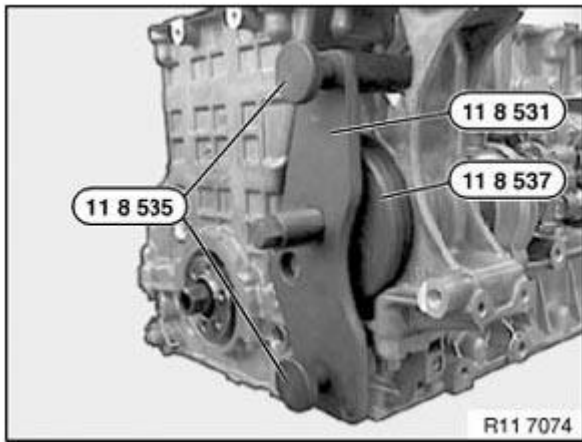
Identifying Special Tools (11 8 535, 11 8 531, 11 8 537)
